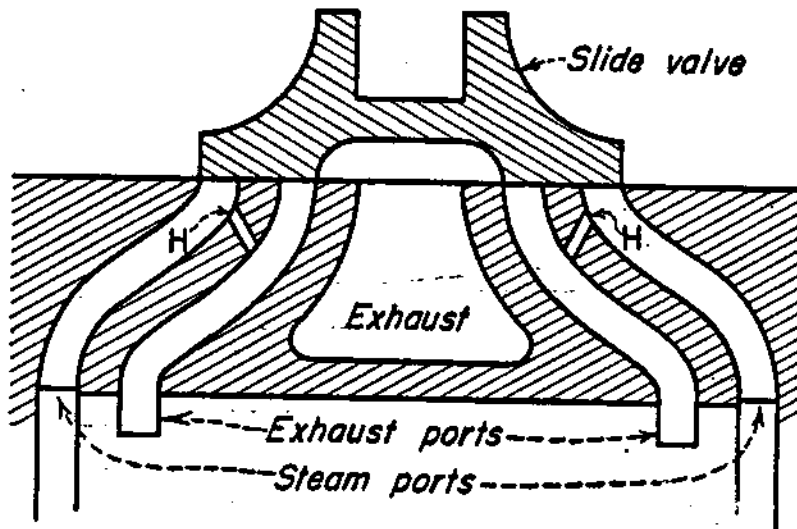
Small duplex steam cylinder with drilled holes (H) for cushion release.
